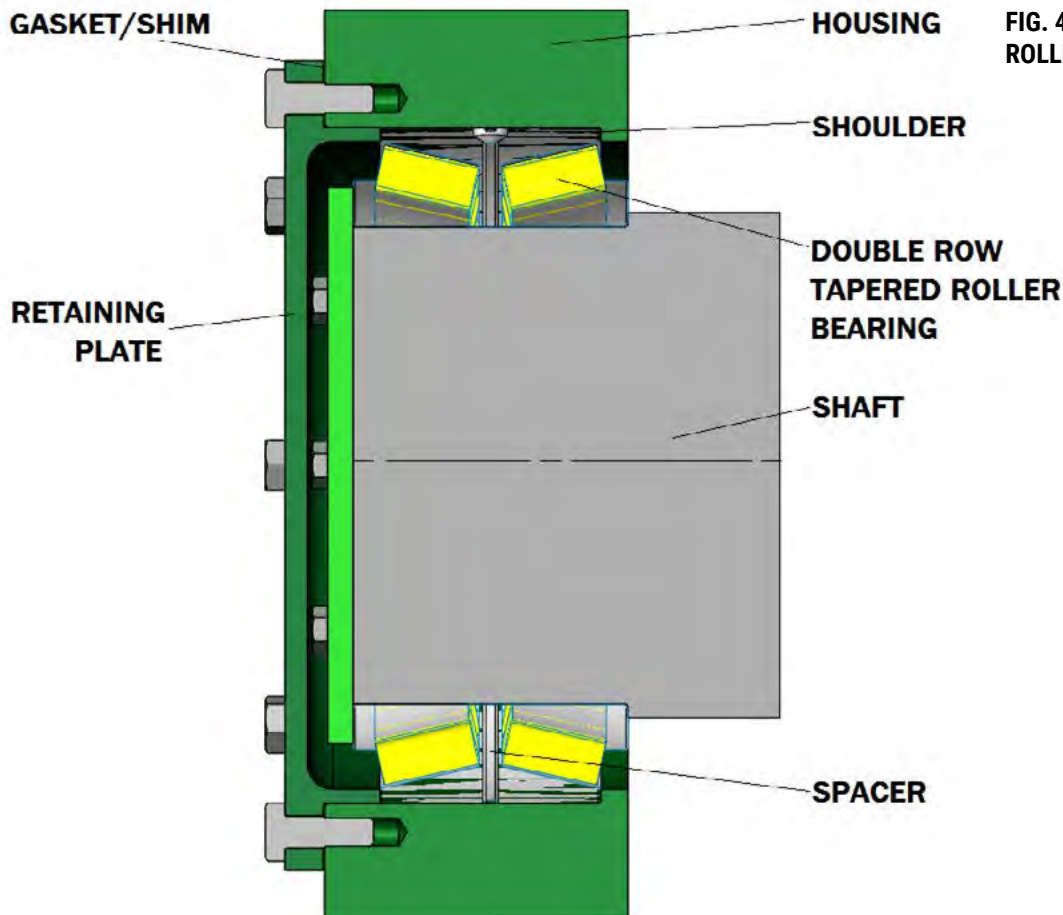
DOUBLE ROW TAPERED ROLLER BEARING
